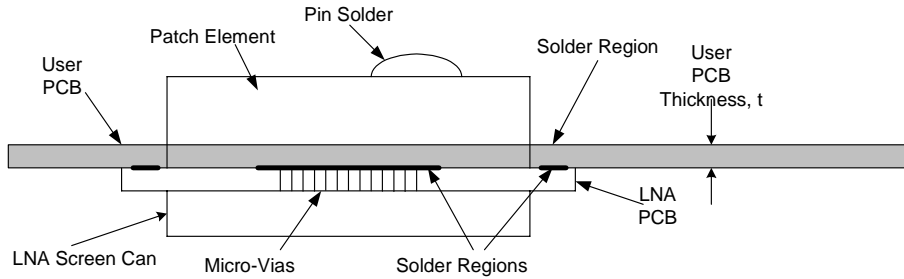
, Soldered attachment with 13mm antenna “Inserted” into the User PCB
